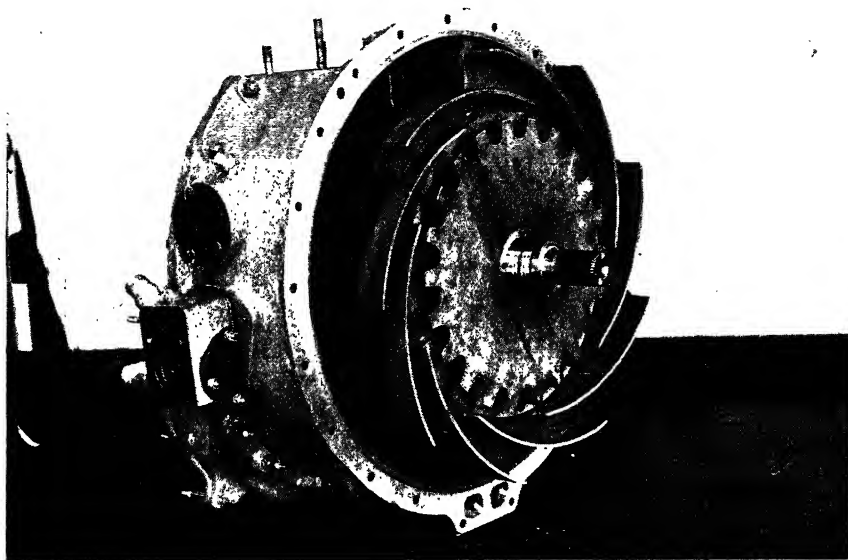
FRONT OF SUPERCHARGER HOUSING SHOWING IMPELLER AND DRIVE SHAFT
